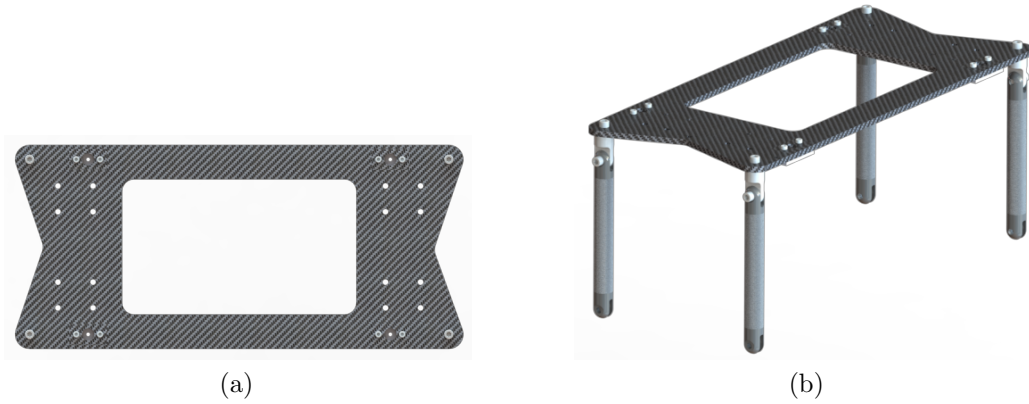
Mounting plate for DJI M600: (a) top view, (b) isometric view
